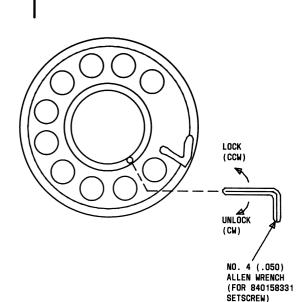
Remove Fingerwheel on 8U (MD), 8W(MD), or 8WA Dial
